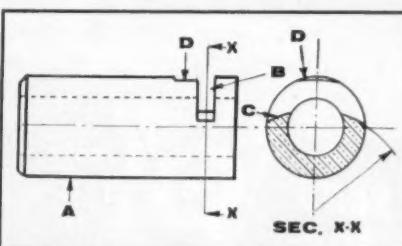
Sleeve type component for which lathe chuck shown in Fig. 1 was modified so that several of these components could be machined simultaneously by means of a single cutter.
